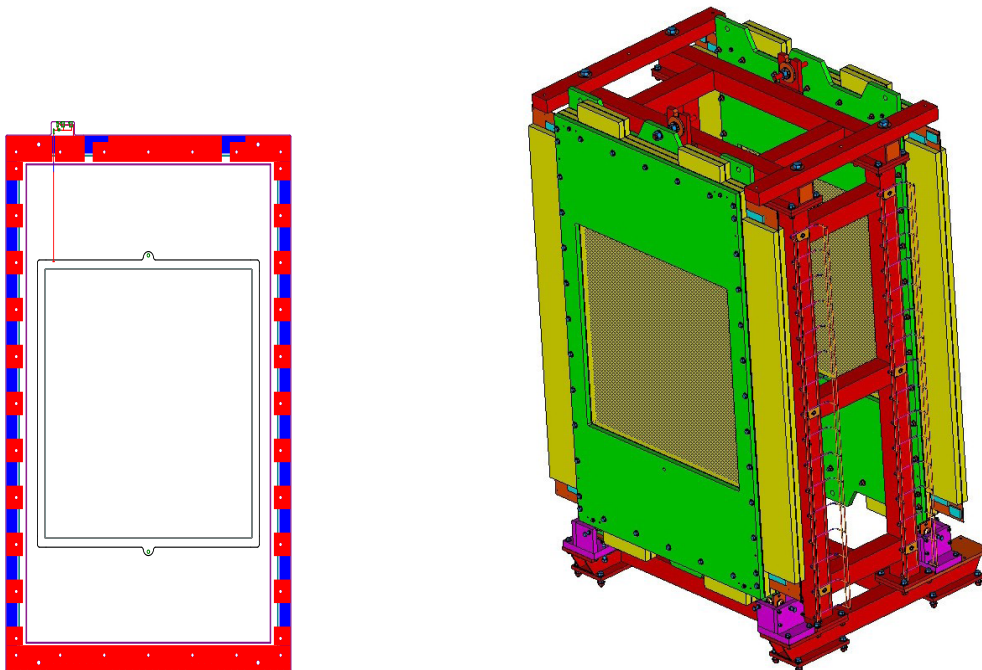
(Left) Technical drawing of cathode (k-plane) PCB. (Right) Technical drawing of the two drift chambers mounted in the Aluminum frame such that the scattered particles would enter the chamber from the left. The chambers are fixed to the frame by a bolt through the top tab on the chamber plate which allows for fine adjustments to the pitch. The downstream chamber (DC2) is mounted in the reverse orientation from the upstream chamber (DC1).
